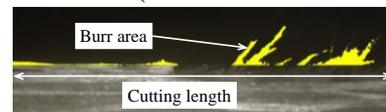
Cross-section images after cutting tests with a diamond-coated end-mill for  $f = 0.15$  mm/rev (unidirectional CFRP).
